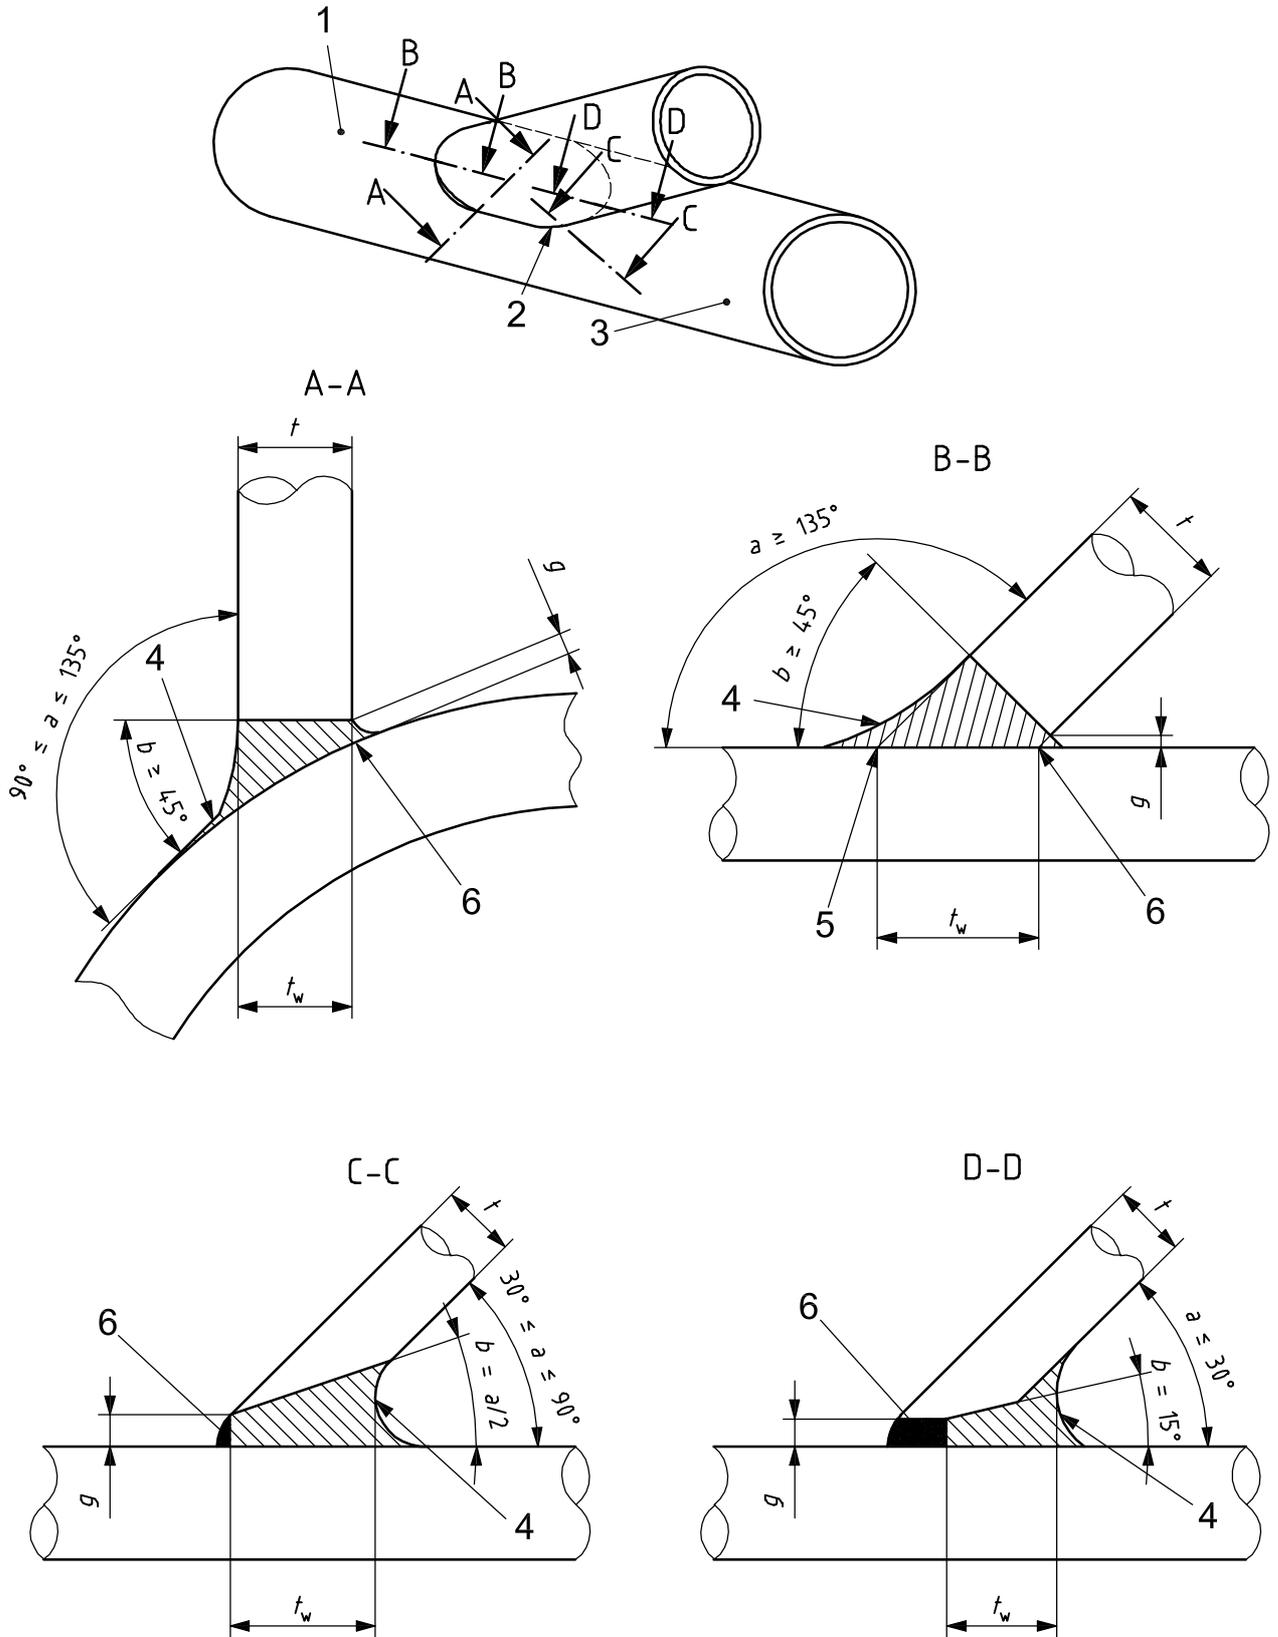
Welded tubular joints — shield metal arc (stick) welding
